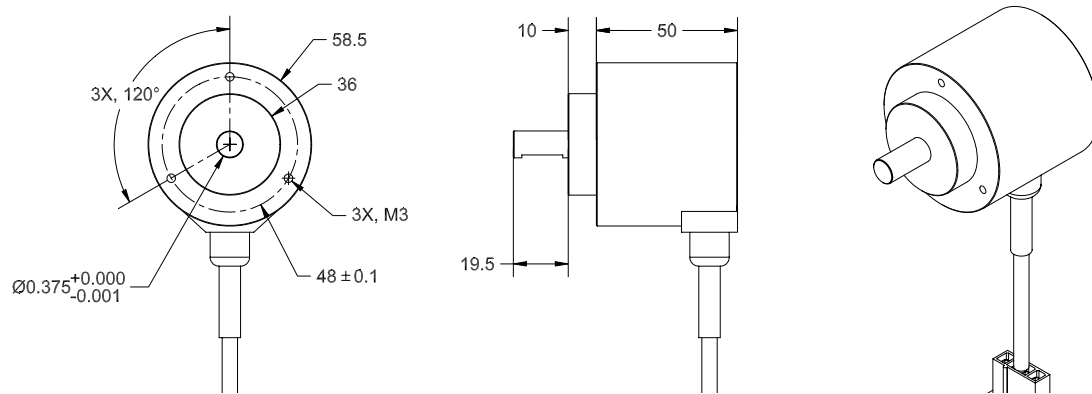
Standard encoder dimensions (P/N 9100188A). Dimensions are in metric excluding the shaft diameter which is in inches.
